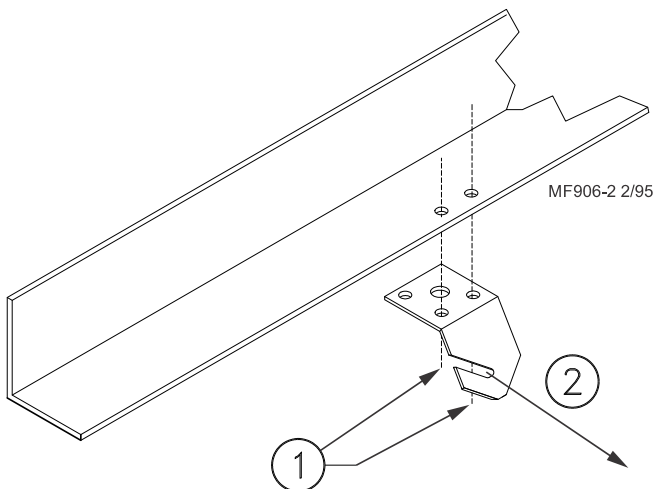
Narrow Steel Truss Ceiling Bracket Installation
